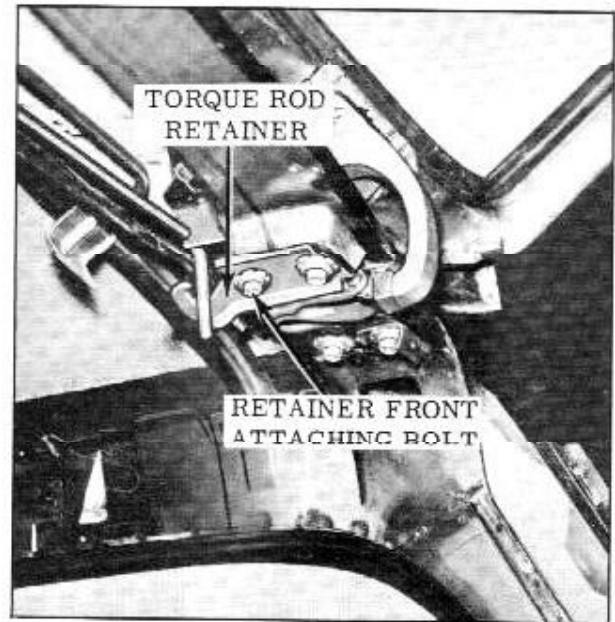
Back Door Hinge & Torque Rod Retainer
